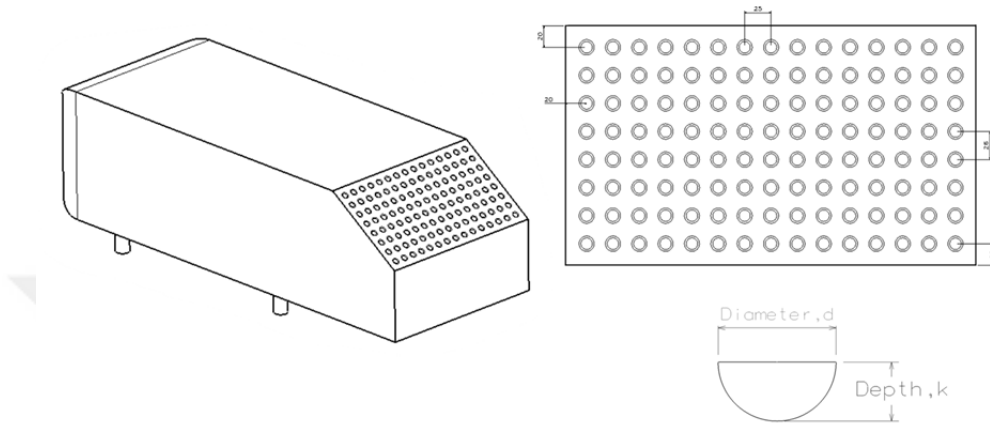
Ahmed body with dimple surfaces and dimensions in mm
